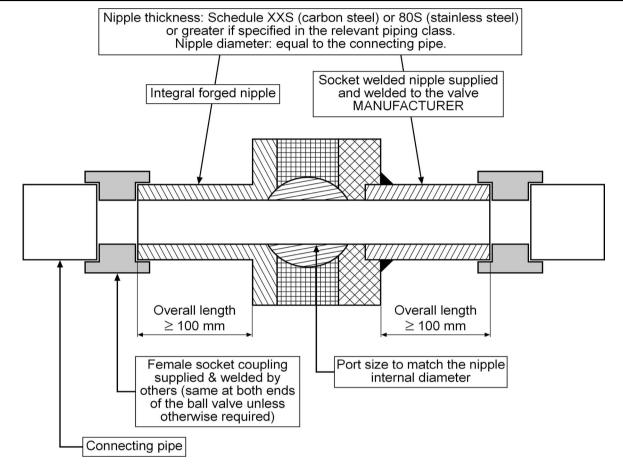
Typical requirements for nipples on socket-welded end ball valves
